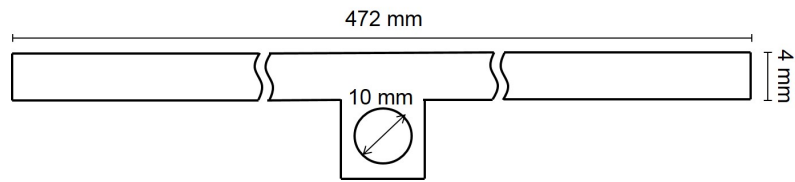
Drawing of one cooling panel stating the dimensions.
